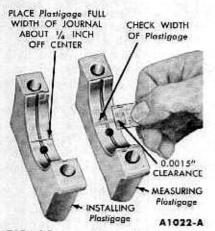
Installing and Measuring Plastigage—Engine in Chassis
